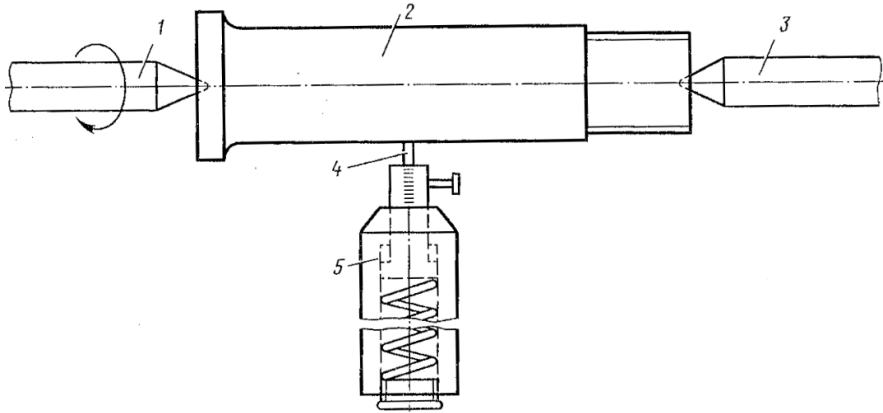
Setting the workpiece and brass rod for friction-based brass plating on a lathe
